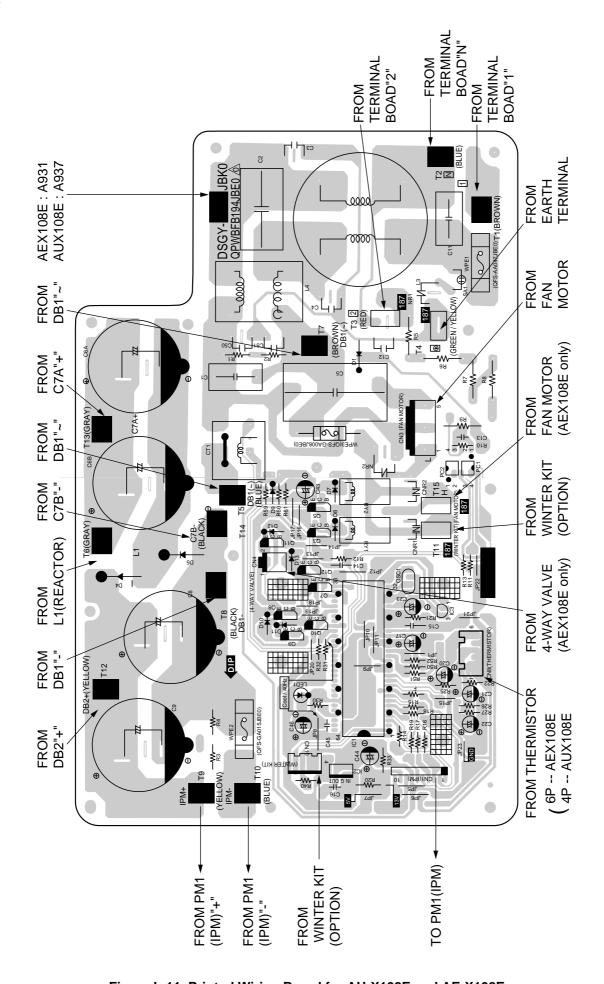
Printed Wiring Board for AU-X108E and AE-X108E
